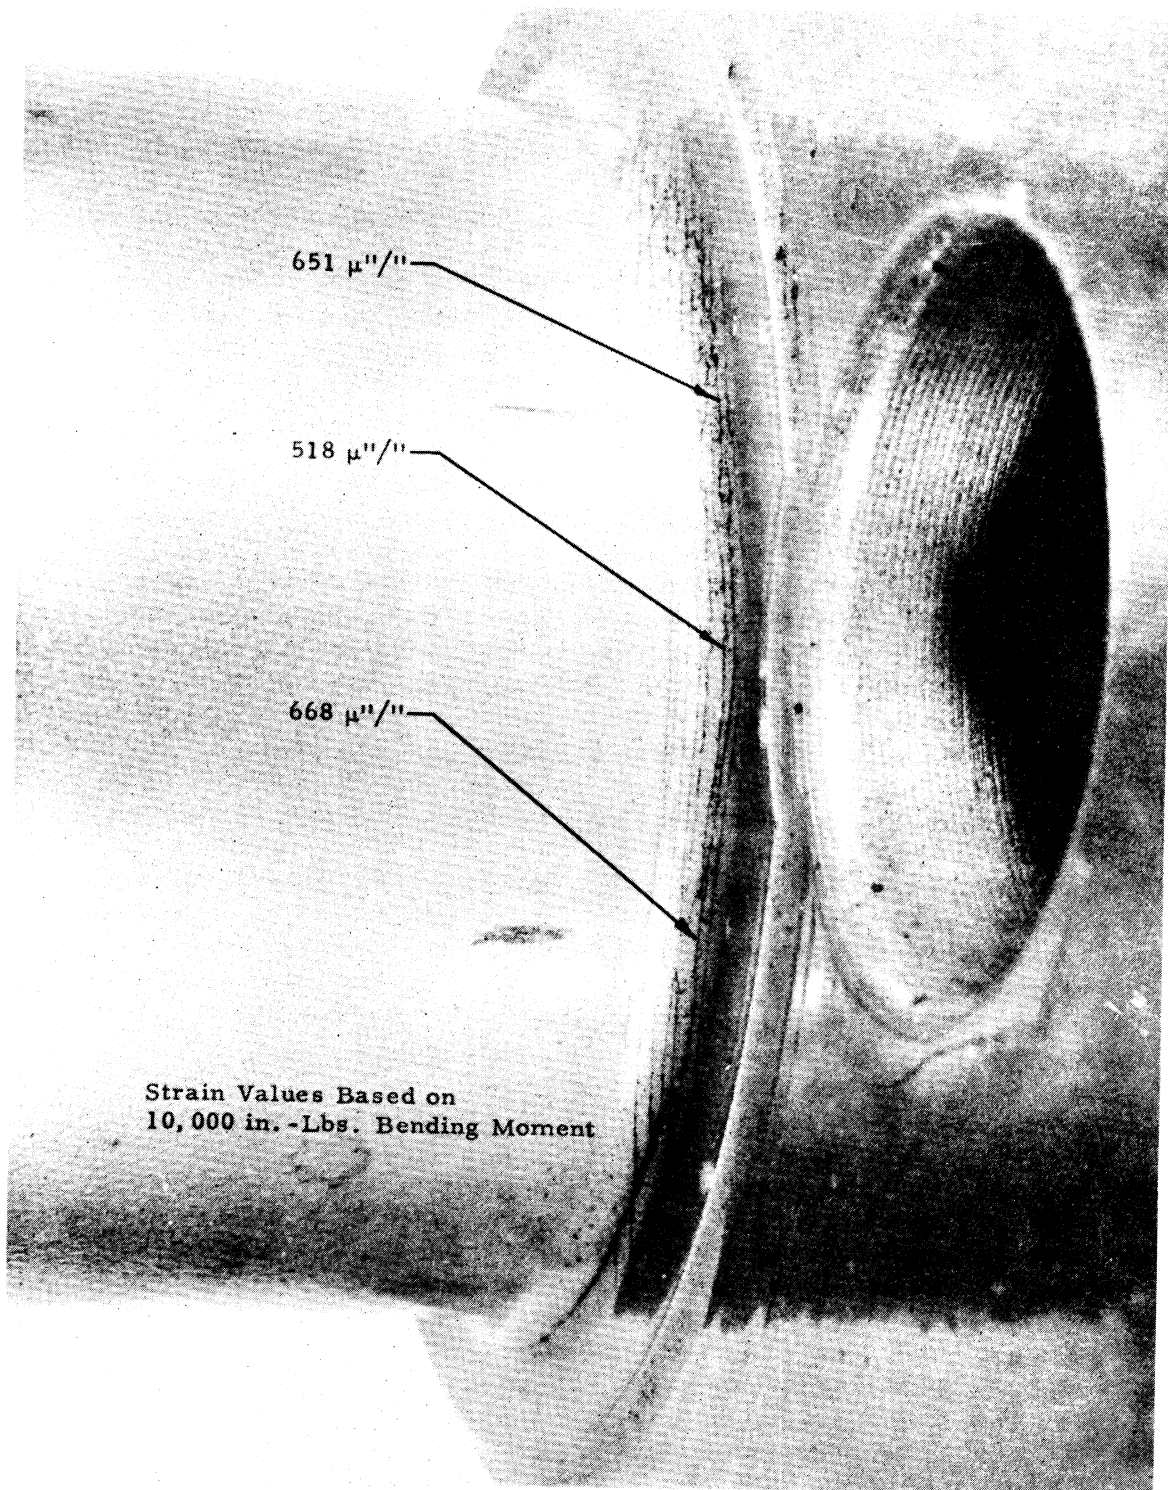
Stresscoat Pattern on Present Design, Forged Crankshaft, P/N 529083 - S.L. 258.
